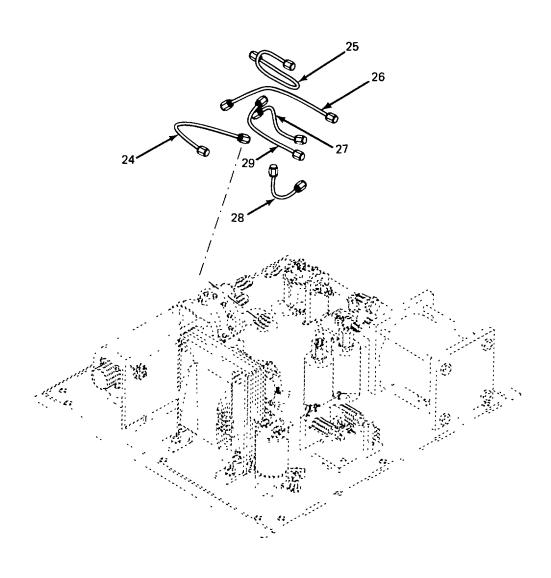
BOTTOM PLATE ASSEMBLY (91-10004) (SHEET 2 OF 4)
